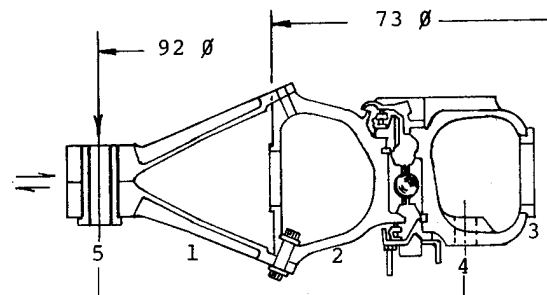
Cross Section of E-3A Turntable Bearing. (1) Leg Truss, (2) Outer Ring, (3) Inner Ring, (4) Strut Support Pad, (5) Shear Bushing
